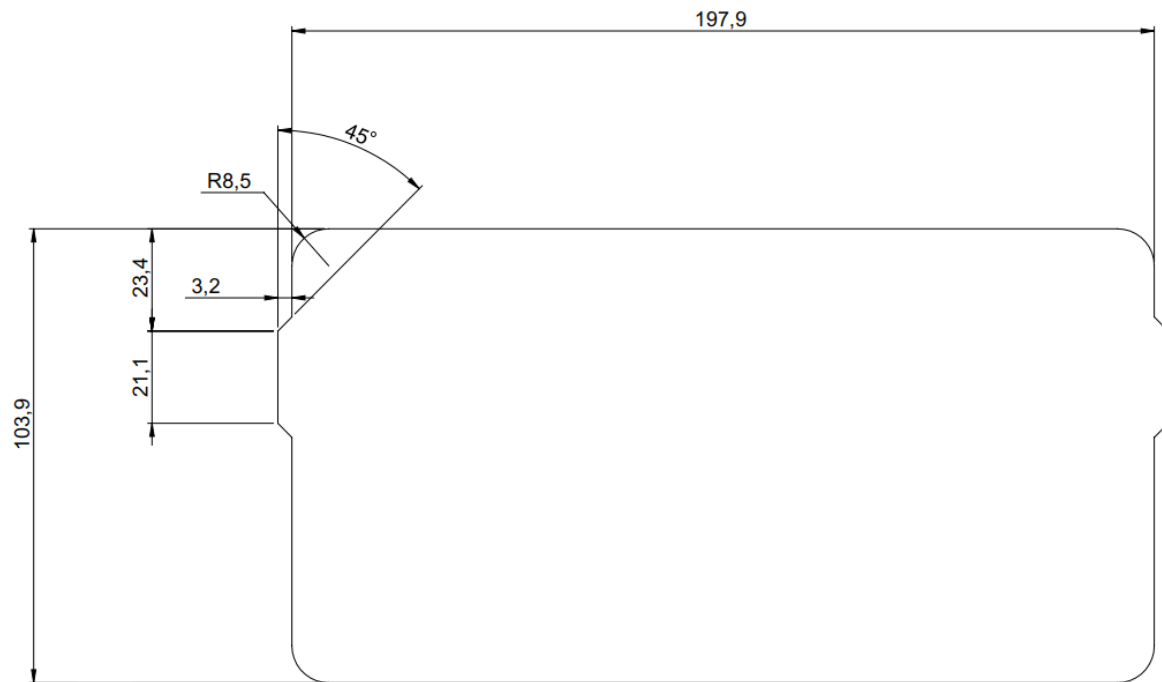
R6 CDU, Cut-out Measurements for Panel Mount [mm]
